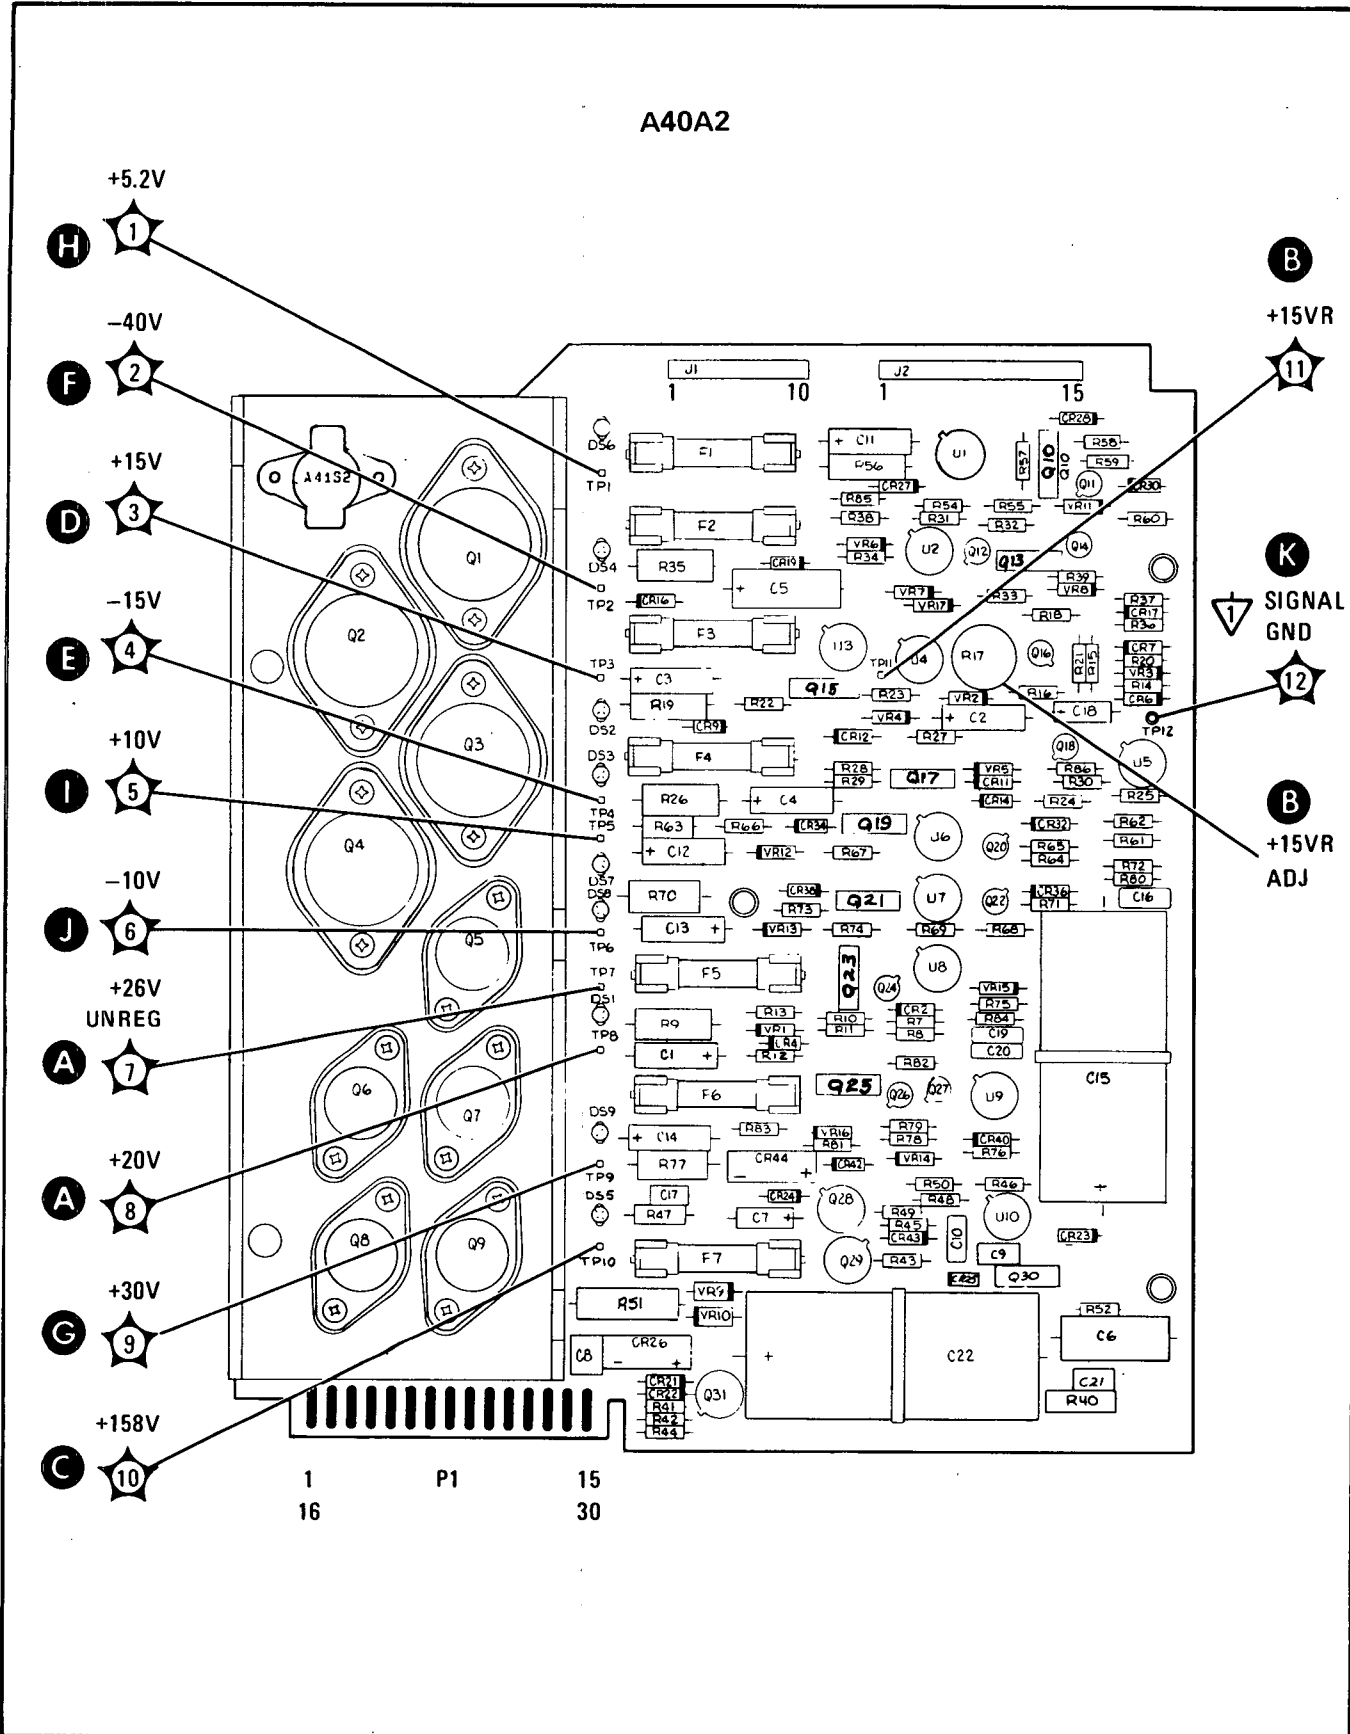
A40A2 Regulator Assembly, Component Locations
